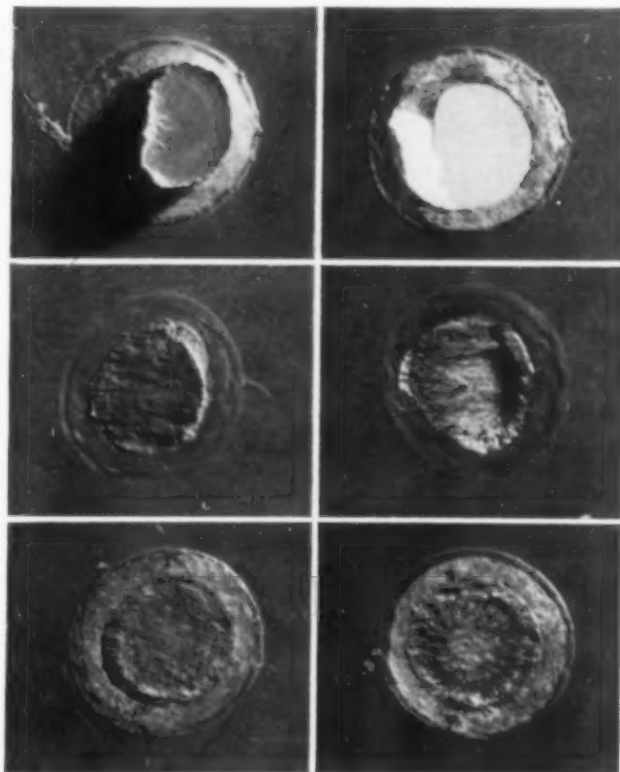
Mating Surfaces of Spot-Welds, Enlarged 3 Times, After Pull Tests. Top is "button" type of failure; middle is "pull out" type; bottom is "clean shear"
